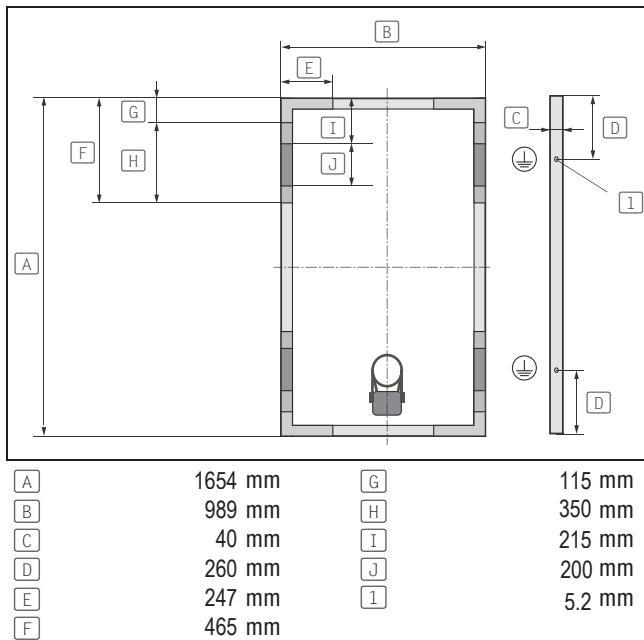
Dimensions [A], [B], [C] of the solar module; Sizes [I] and positions [D] of the grounding holes; Sizes [E], [F], [H], [J] and spacings [G], [I] of the clamping areas of the frame corner
